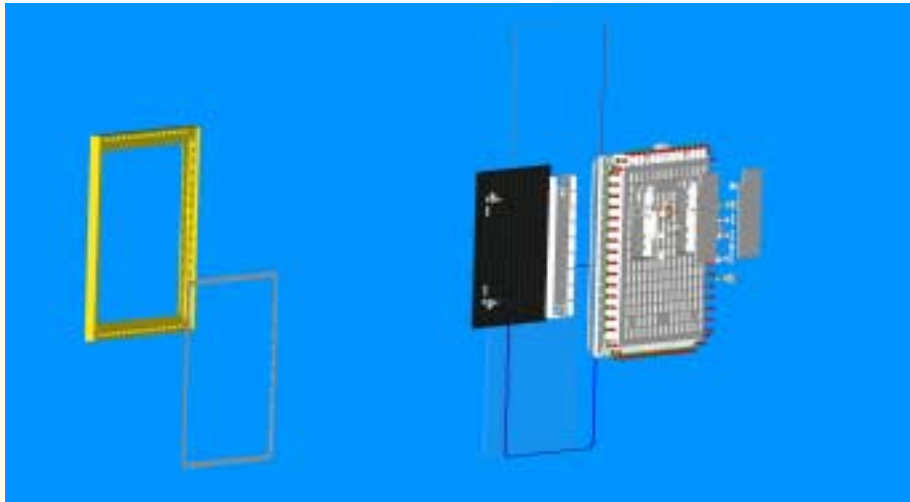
Exploded view of assembly. From left to right, shown components are frame, seal, platform, optics bench, base and plumbing.
